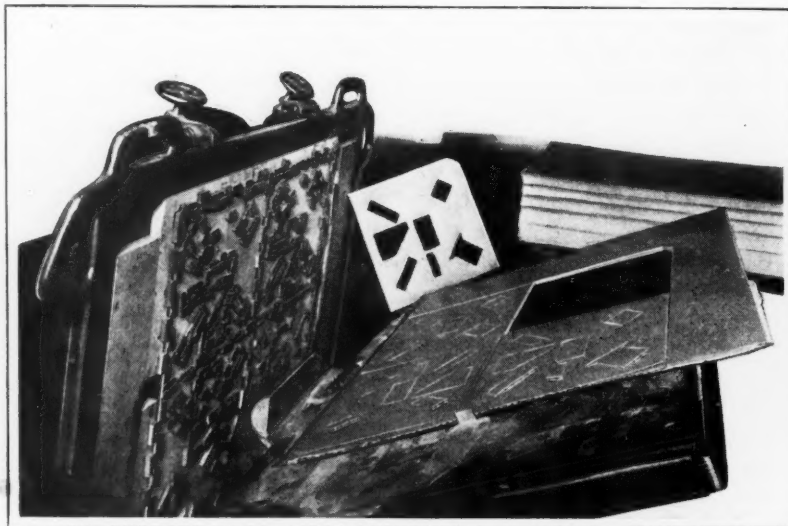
Steel-rule Cutting Die Mounted in Cutting and Creasing Press
